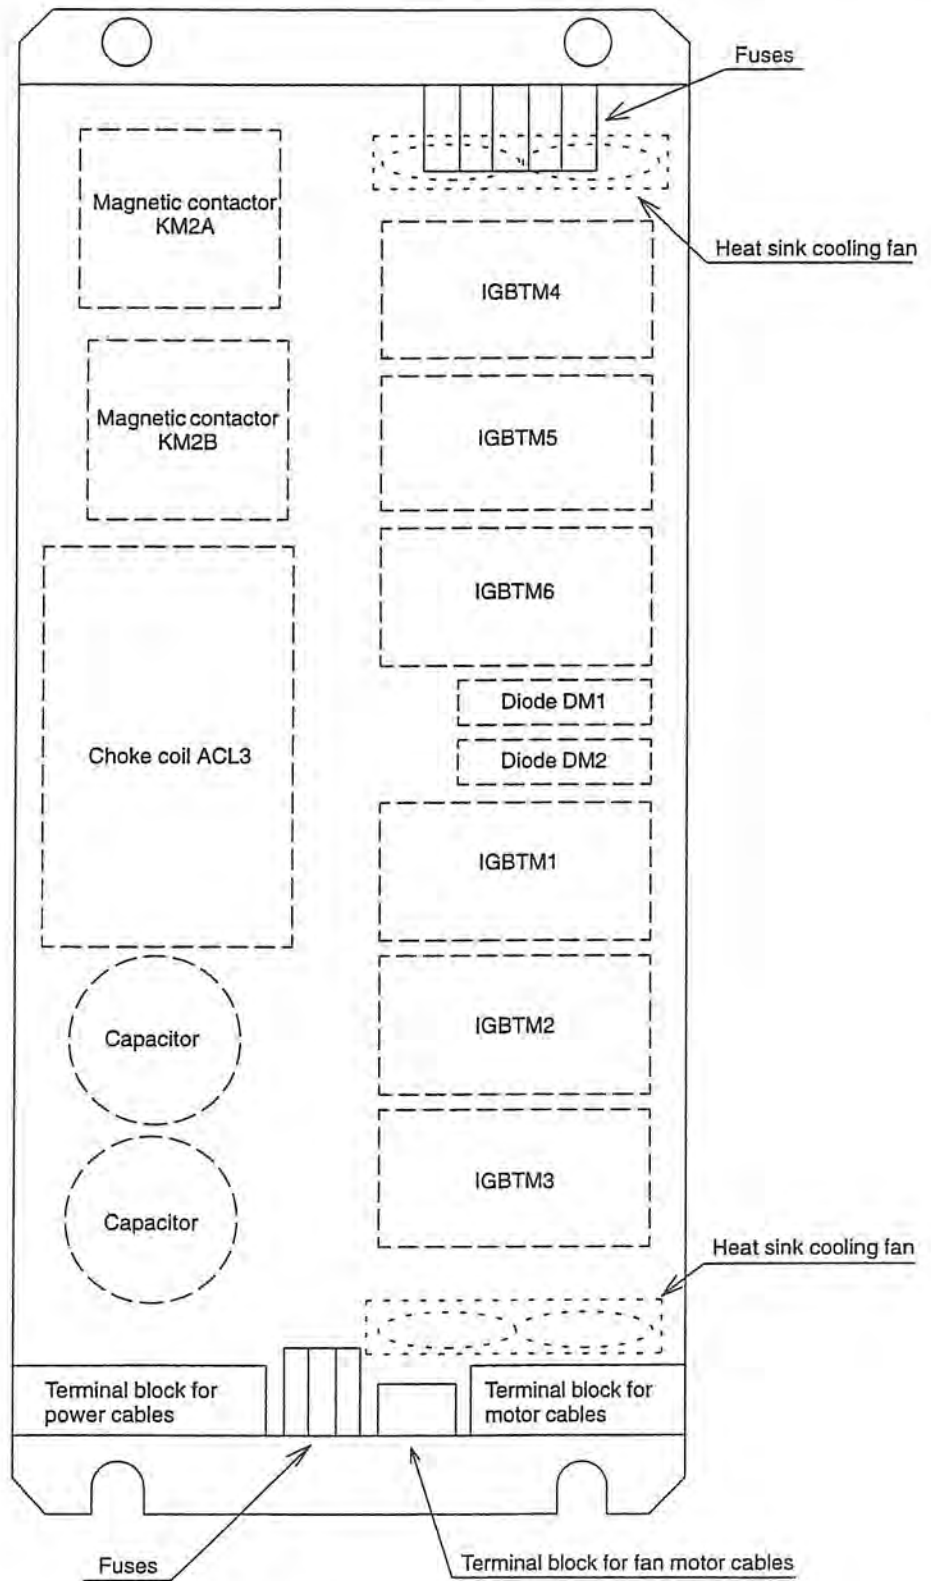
Arrangement of Major Component Parts on Power Unit for D22
